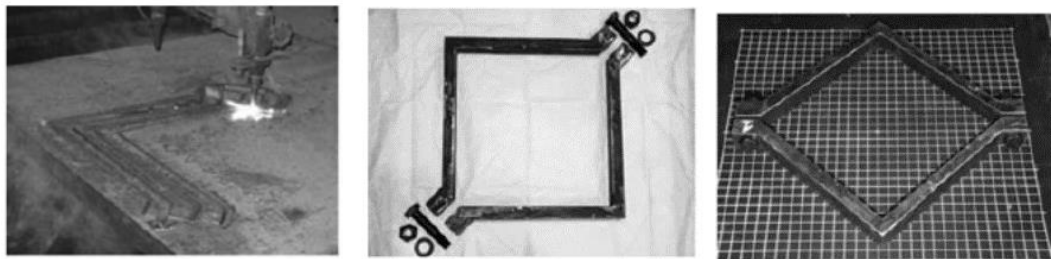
Fabrication and assembled view of the steel collars [38]
